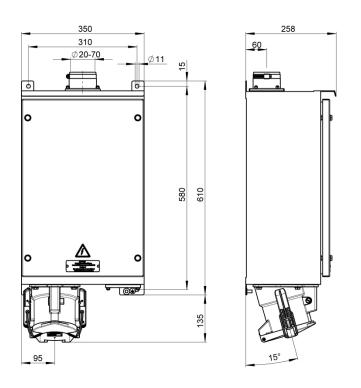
Dimensions Connector Unit with mechanical interlock CUMI B-Line (250 A - 400 A) in mm
